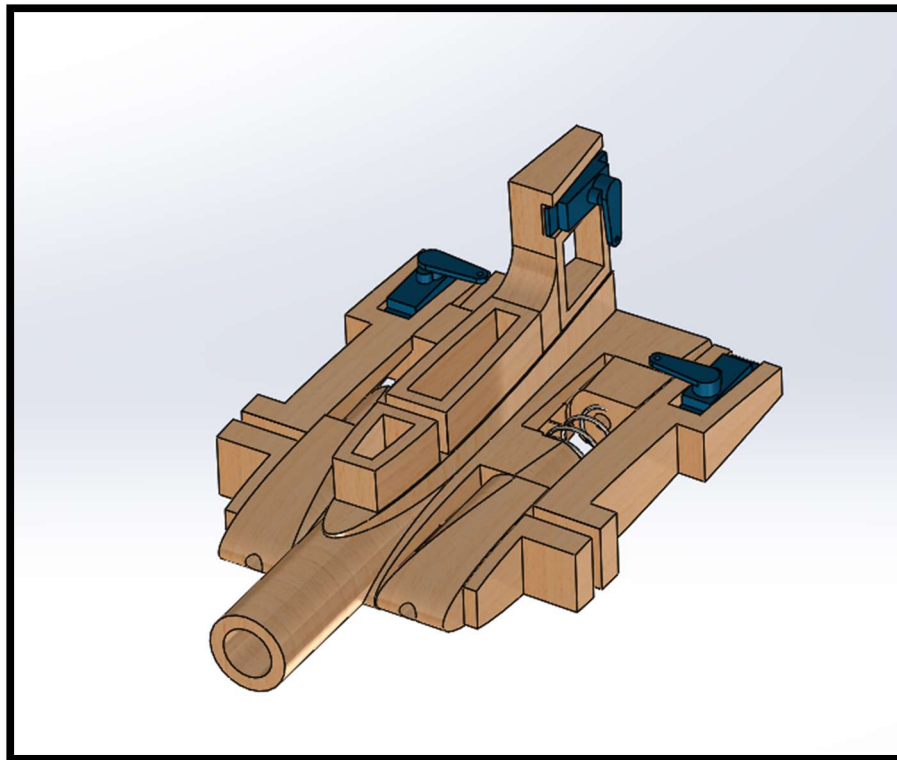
SOLIDWORKS MODEL OF A 3-D PRINTED TAIL JOINT ASSEMBLY
